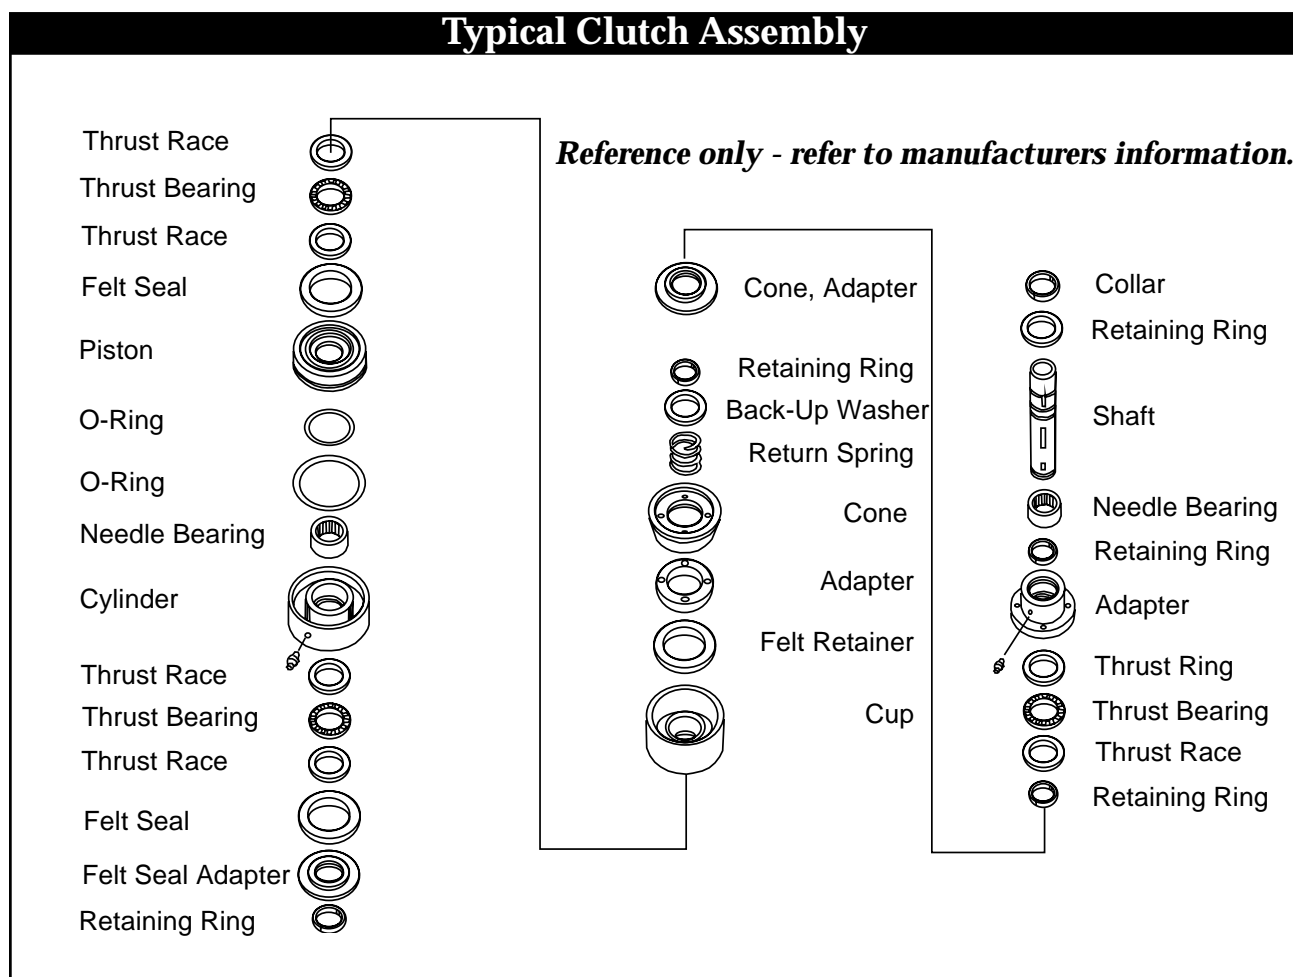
FS-40/50-RD Typical Clutch Assembly
